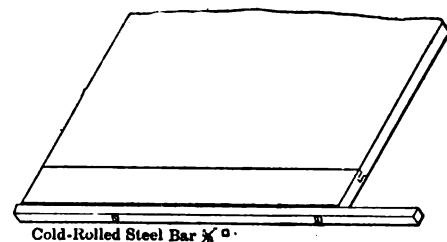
The Straightedge When Applied to Drawing Board and Projecting Beyond It
